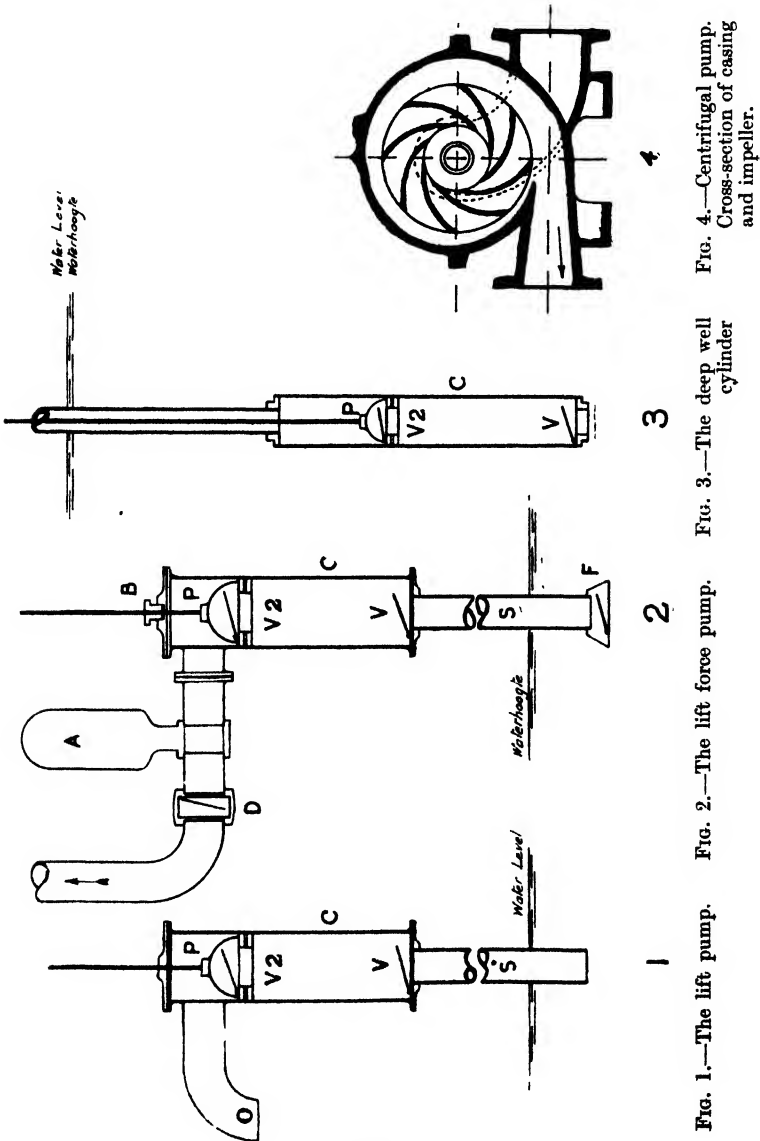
Centrifugal pump. Cross-section of casing and impeller.
